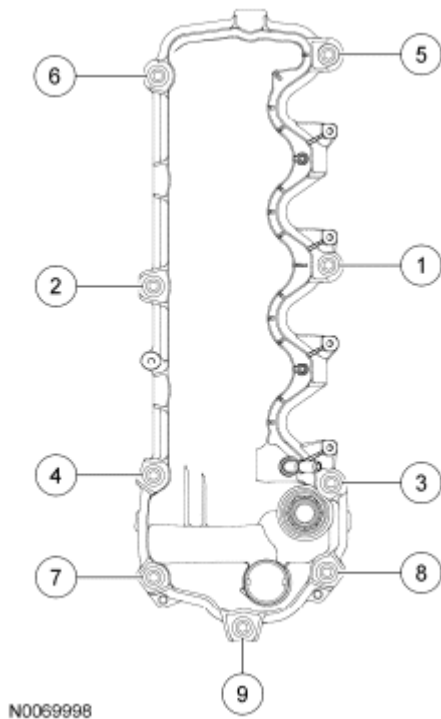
Identifying Cylinder Head Bolt Tightening Sequence
